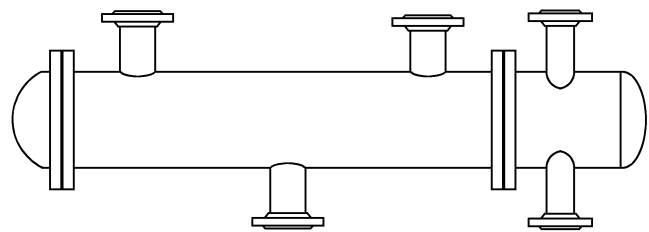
Straight-Tube Fixed Tubesheet Shell-and-Tube Heat Exchanger with Fabricated Bonnet Heads and Split-Shell Flow Design
